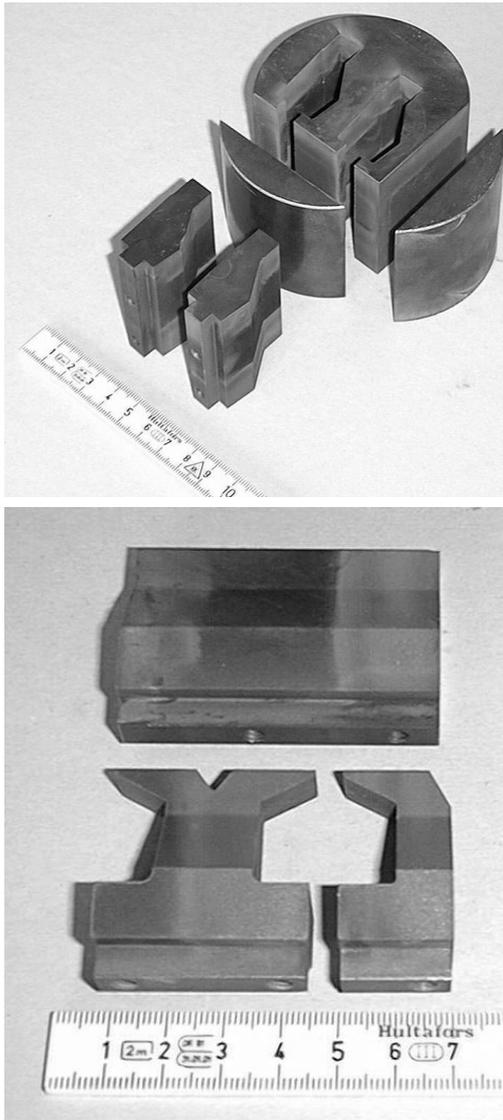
Technological aspects of manufacturing the iron core components of a TFM [8]
